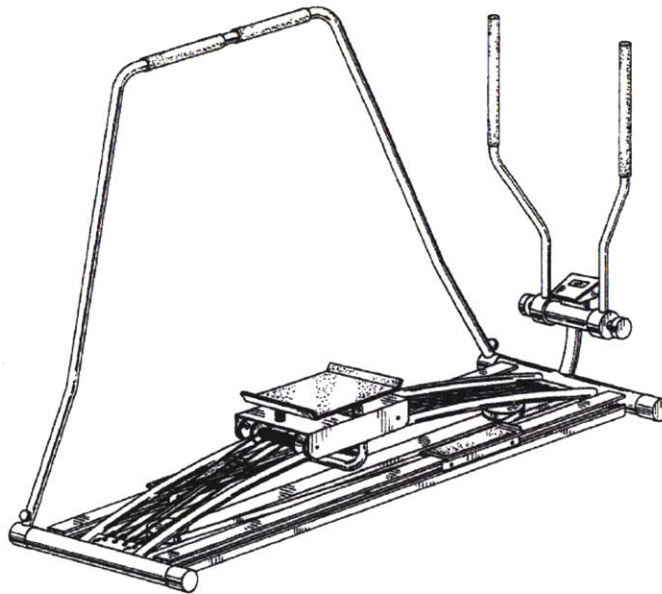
Stamina Products™ Skiing Machine [US Patent 5,429,567]
